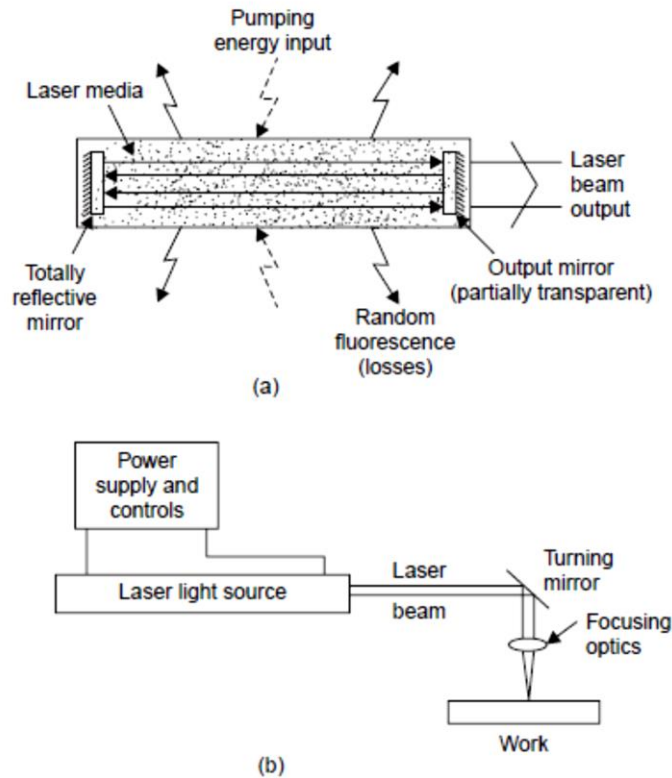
Schematic illustration of laser welding: (a) laser source, (b) welding set up (Khan, 2007).
